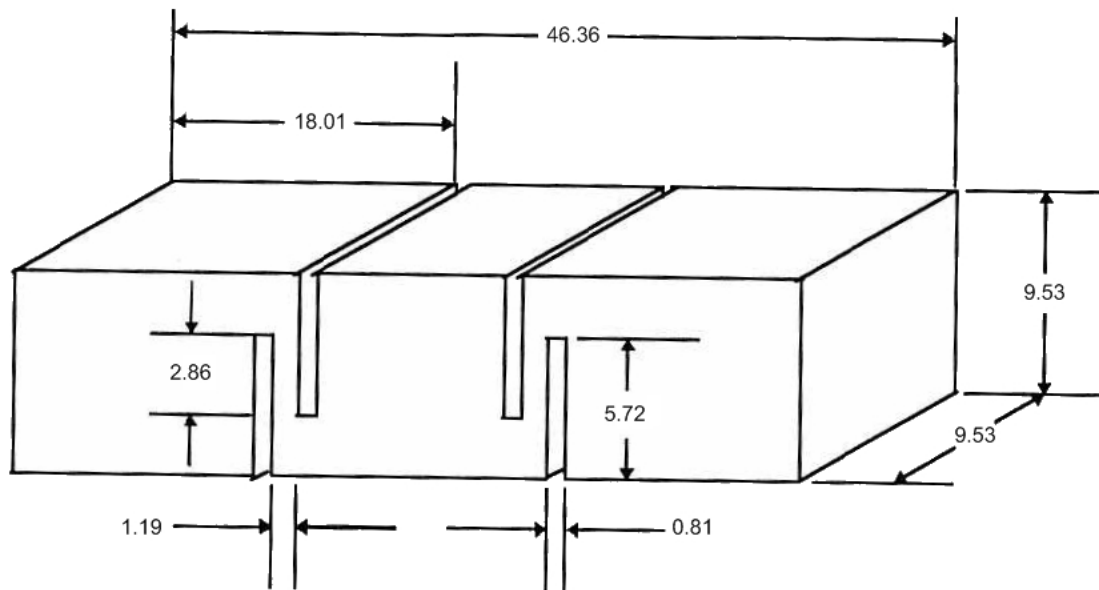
Specimen dimensions of the Double Ligament Tensile Specimen (Johnson, 1994).
